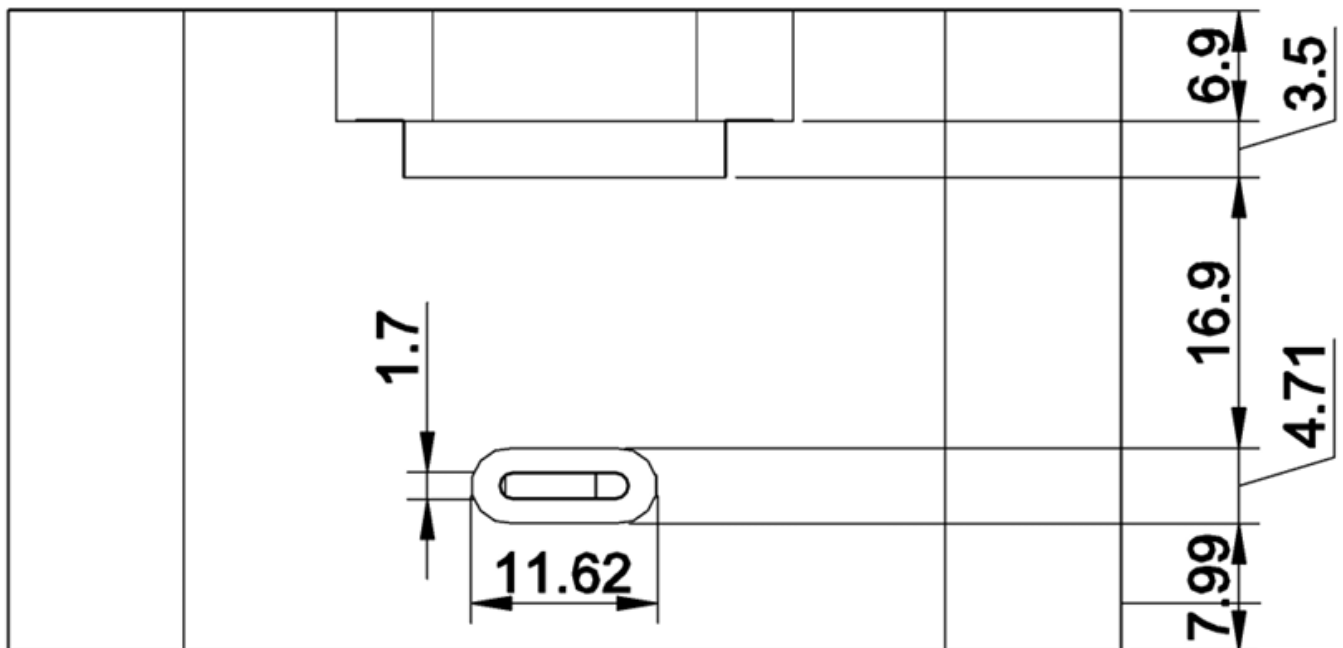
Dimensions for the Body of the Casing, Top View (mm)
